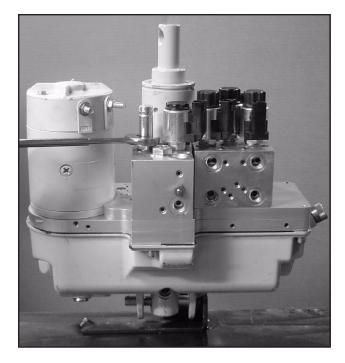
The "S3" Cartridge is removed using a 7/8" wrench or deep well socket.
